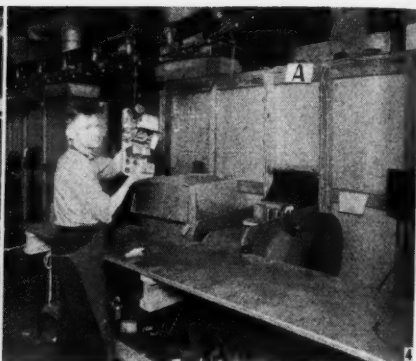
Crosley "Bandbox" sets being conveyed from the assembly floor to the test-booths. Fig. 4—Hanging a tested set on the conveyor to be taken to the cabinet assembly floor. Fig. 5—The "back-track" of the conveyor is utilized to carry rejected sets back to the assembly department.
